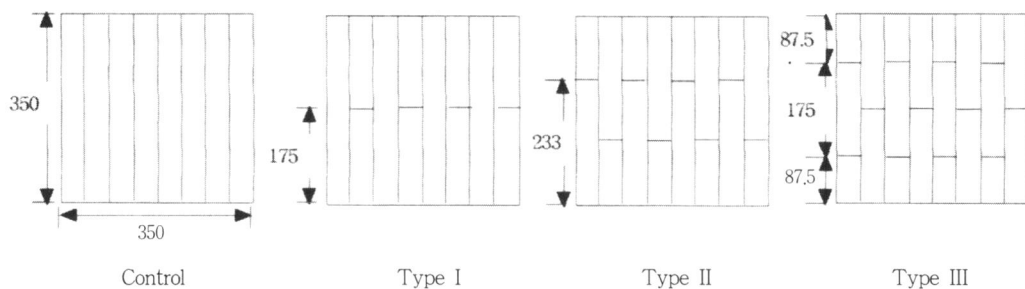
Lay-out pattern of butt joint in lumber core plywood. (unit : mm)
